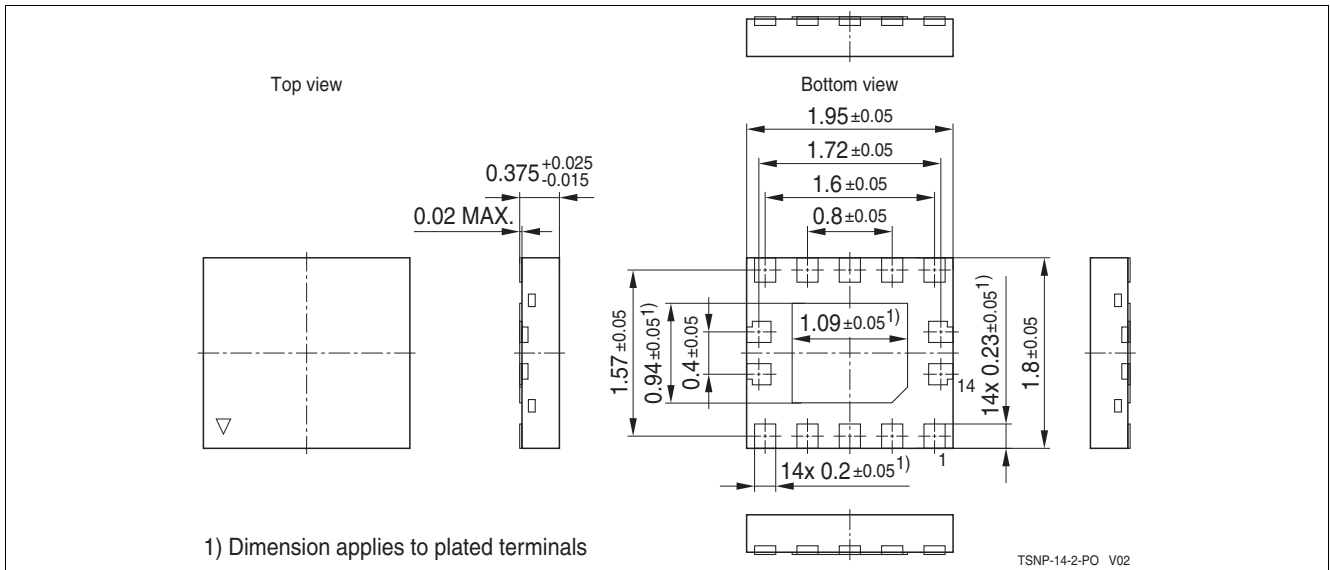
Package outline for TSNP-14-2 (dimension in mm)
